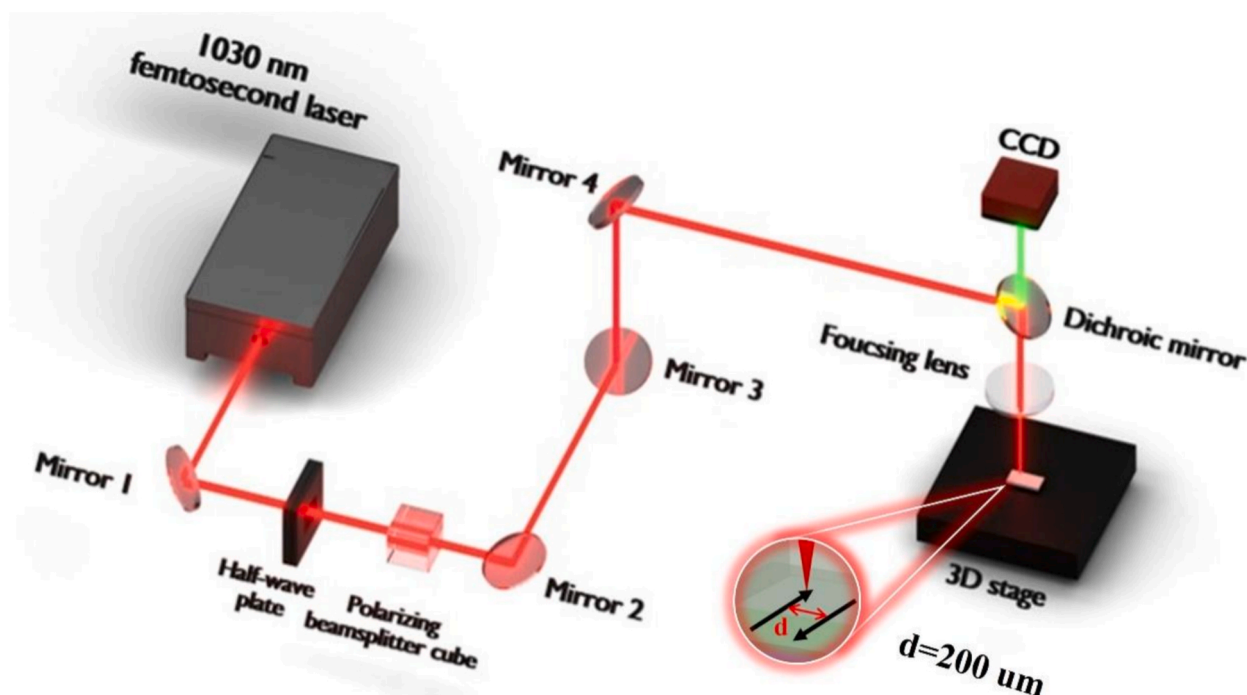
Schematic representation of the femtosecond laser welding system.
